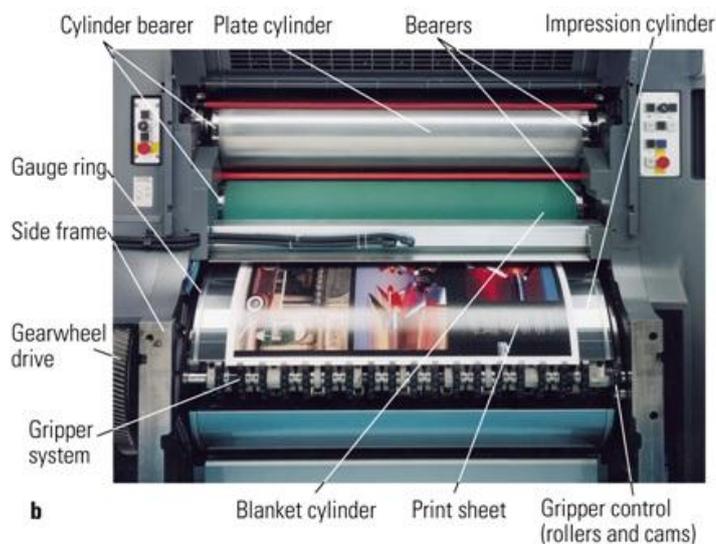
Offset printing unit, bearers, gearwheel and gripper control in Heidelberg's sheet-fed offset press (Kipphan 2001: 222).
